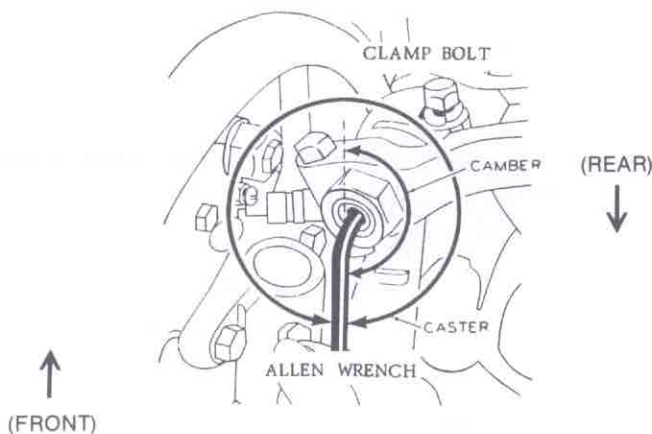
Caster and camber are adjusted at the same pin. Maximum camber can be obtained in not more than 1/2 turn from the correct caster setting—Chevrolet shown
